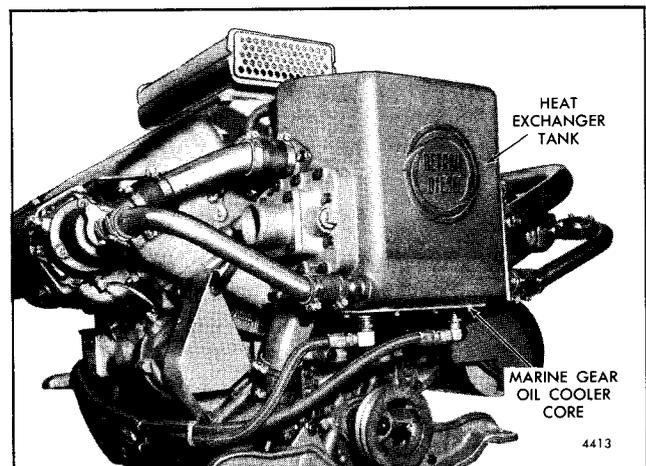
Typical Marine Gear Oil Cooler Core Mounting
